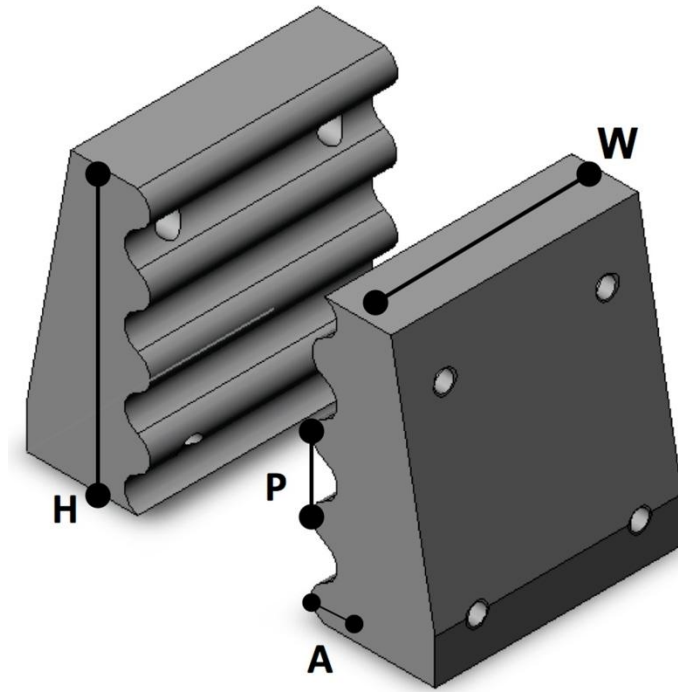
Schematic Drawing of Wedge-Shaped Clamp Pads Machined from Stainless Steel.
